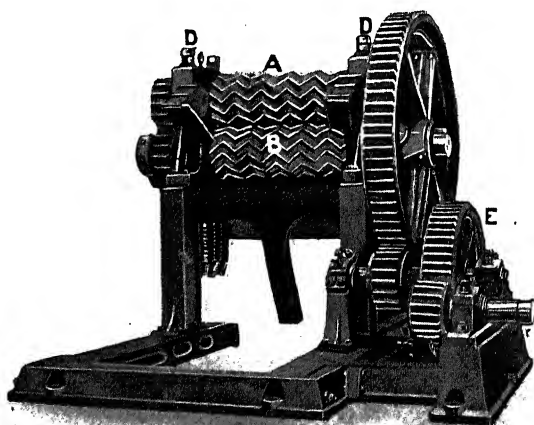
Krajewski cane-crusher, with gearing for driving.
